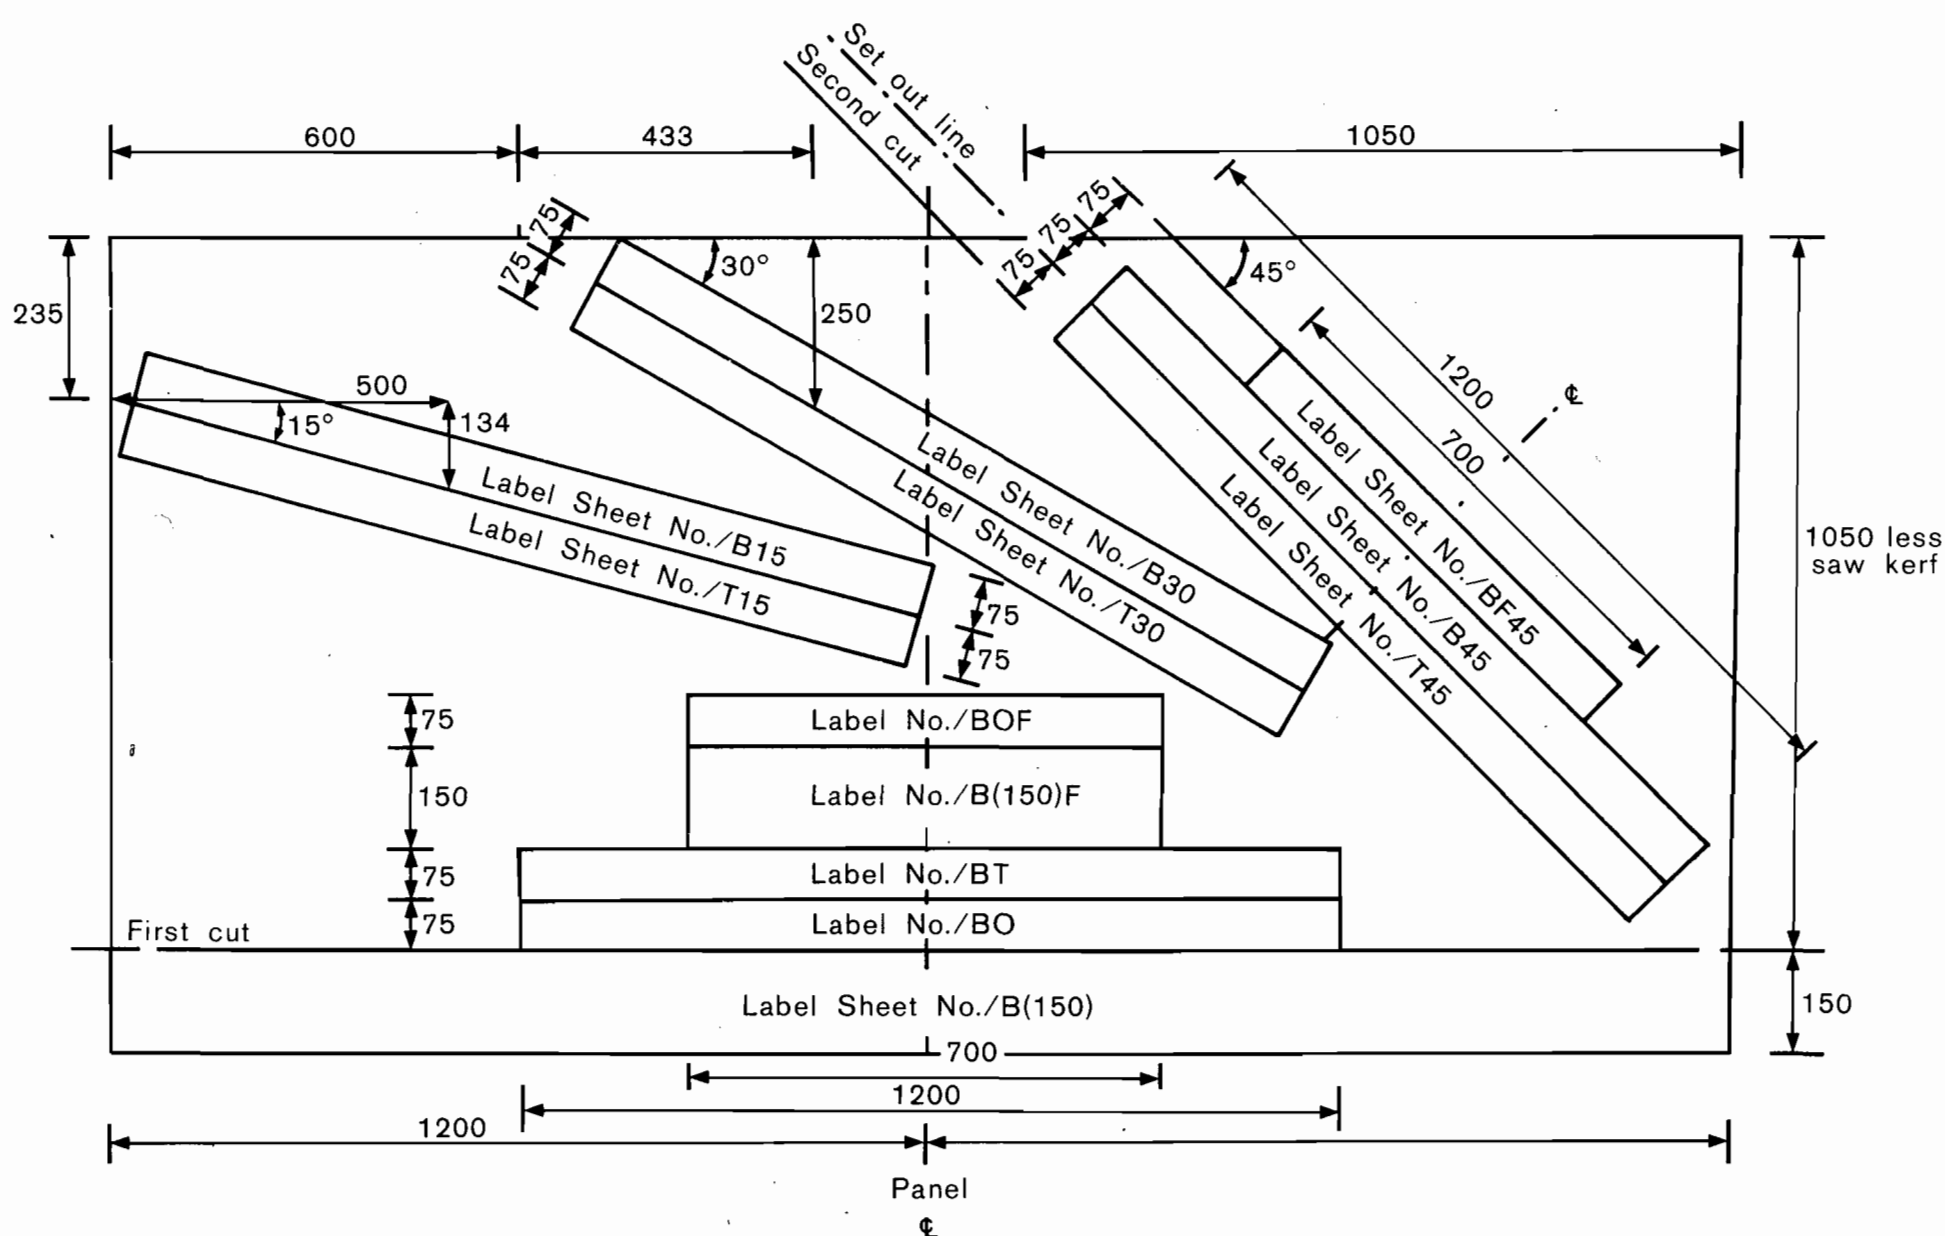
Cutting plan for 10 sheets of clear plywood, 5-ply, 12.5 mm thick.
